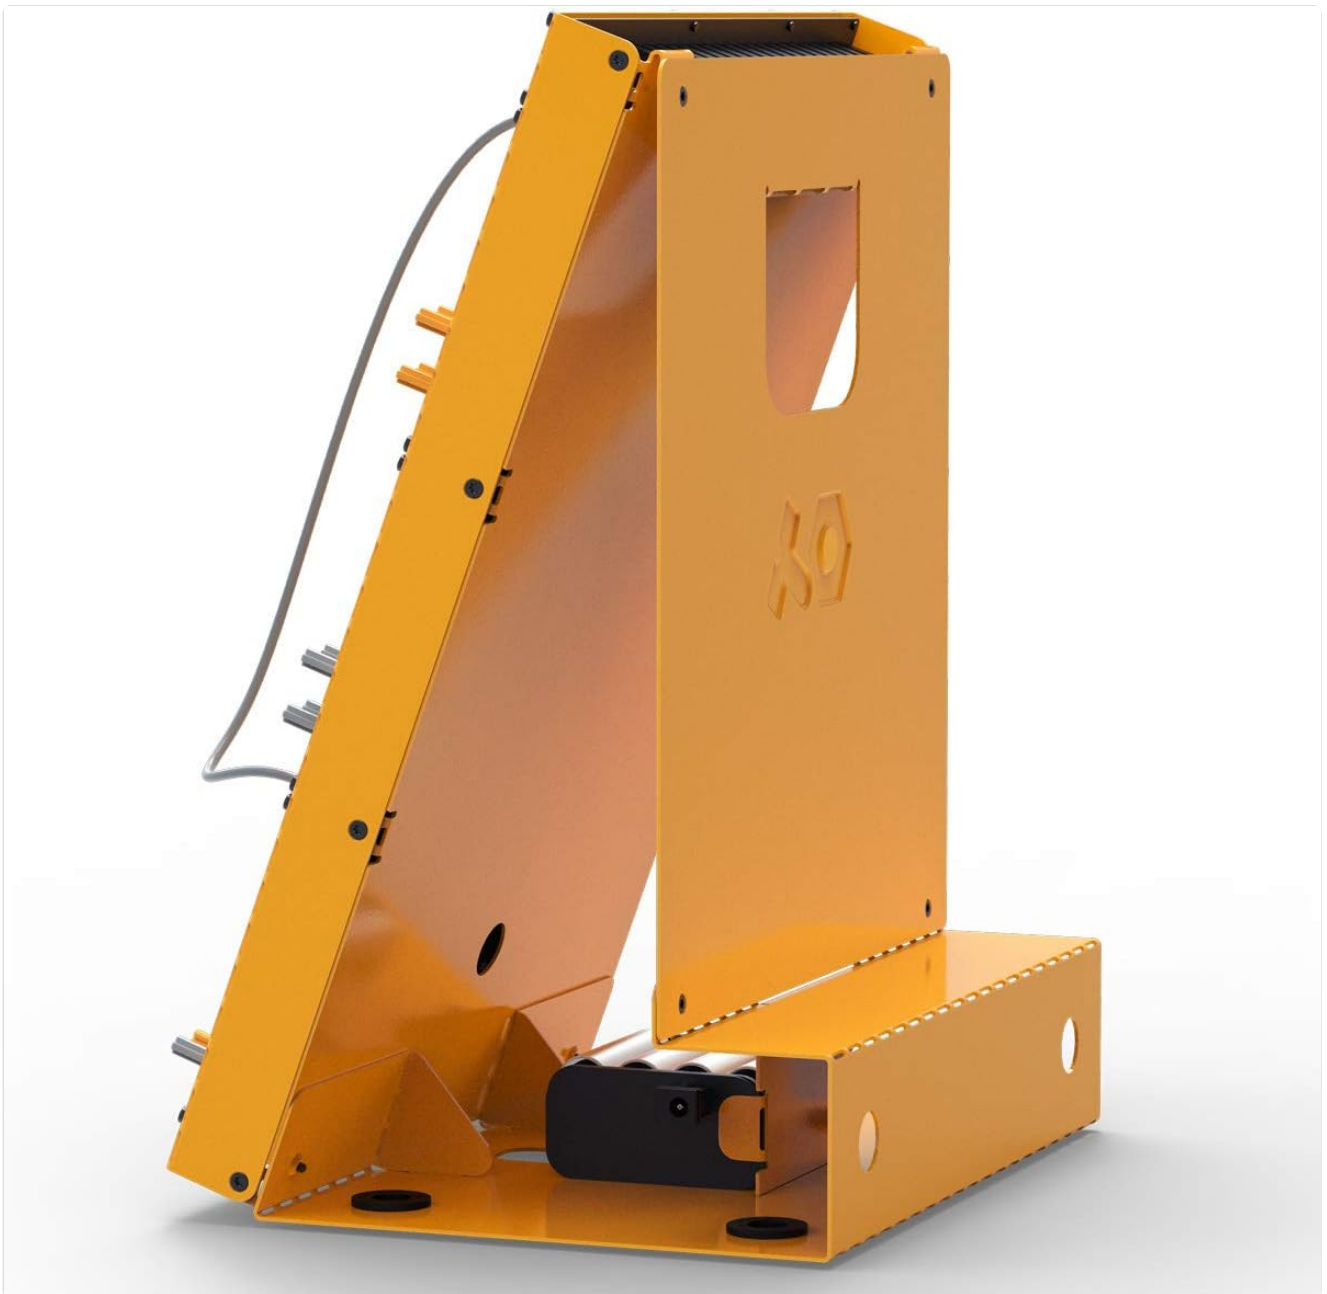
Rear view showing the stand mechanism and the battery pack installation.
